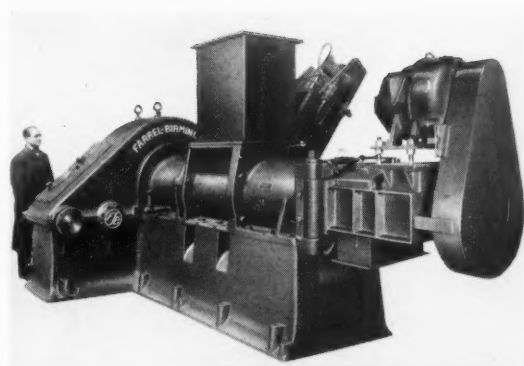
Extruder-pelletizer with end-delivery head for handling compounded and finished stock. This machine has independent motor for operating the cut-off knives
